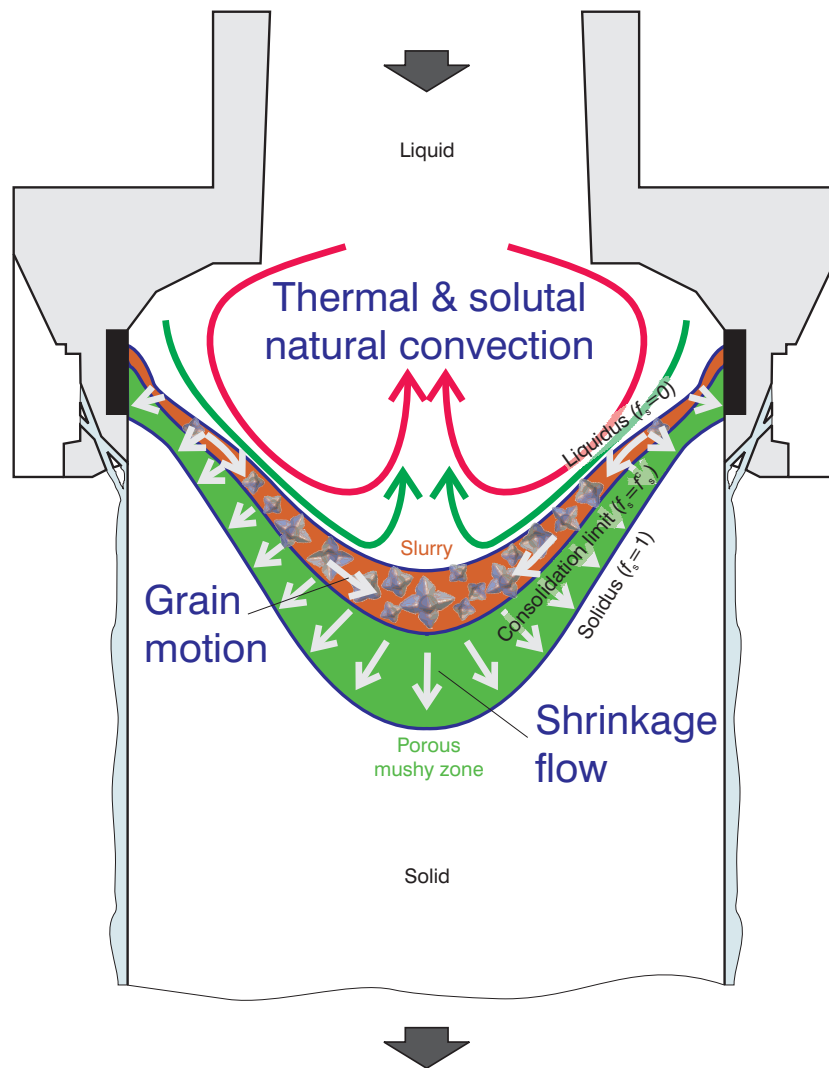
Transport mechanisms causing macrosegregation in DC casting.
